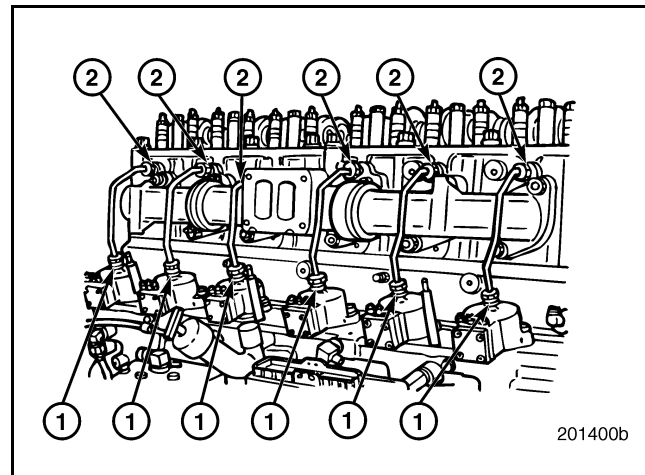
Fuel Nozzle Inlet Tube Assembly Installation
